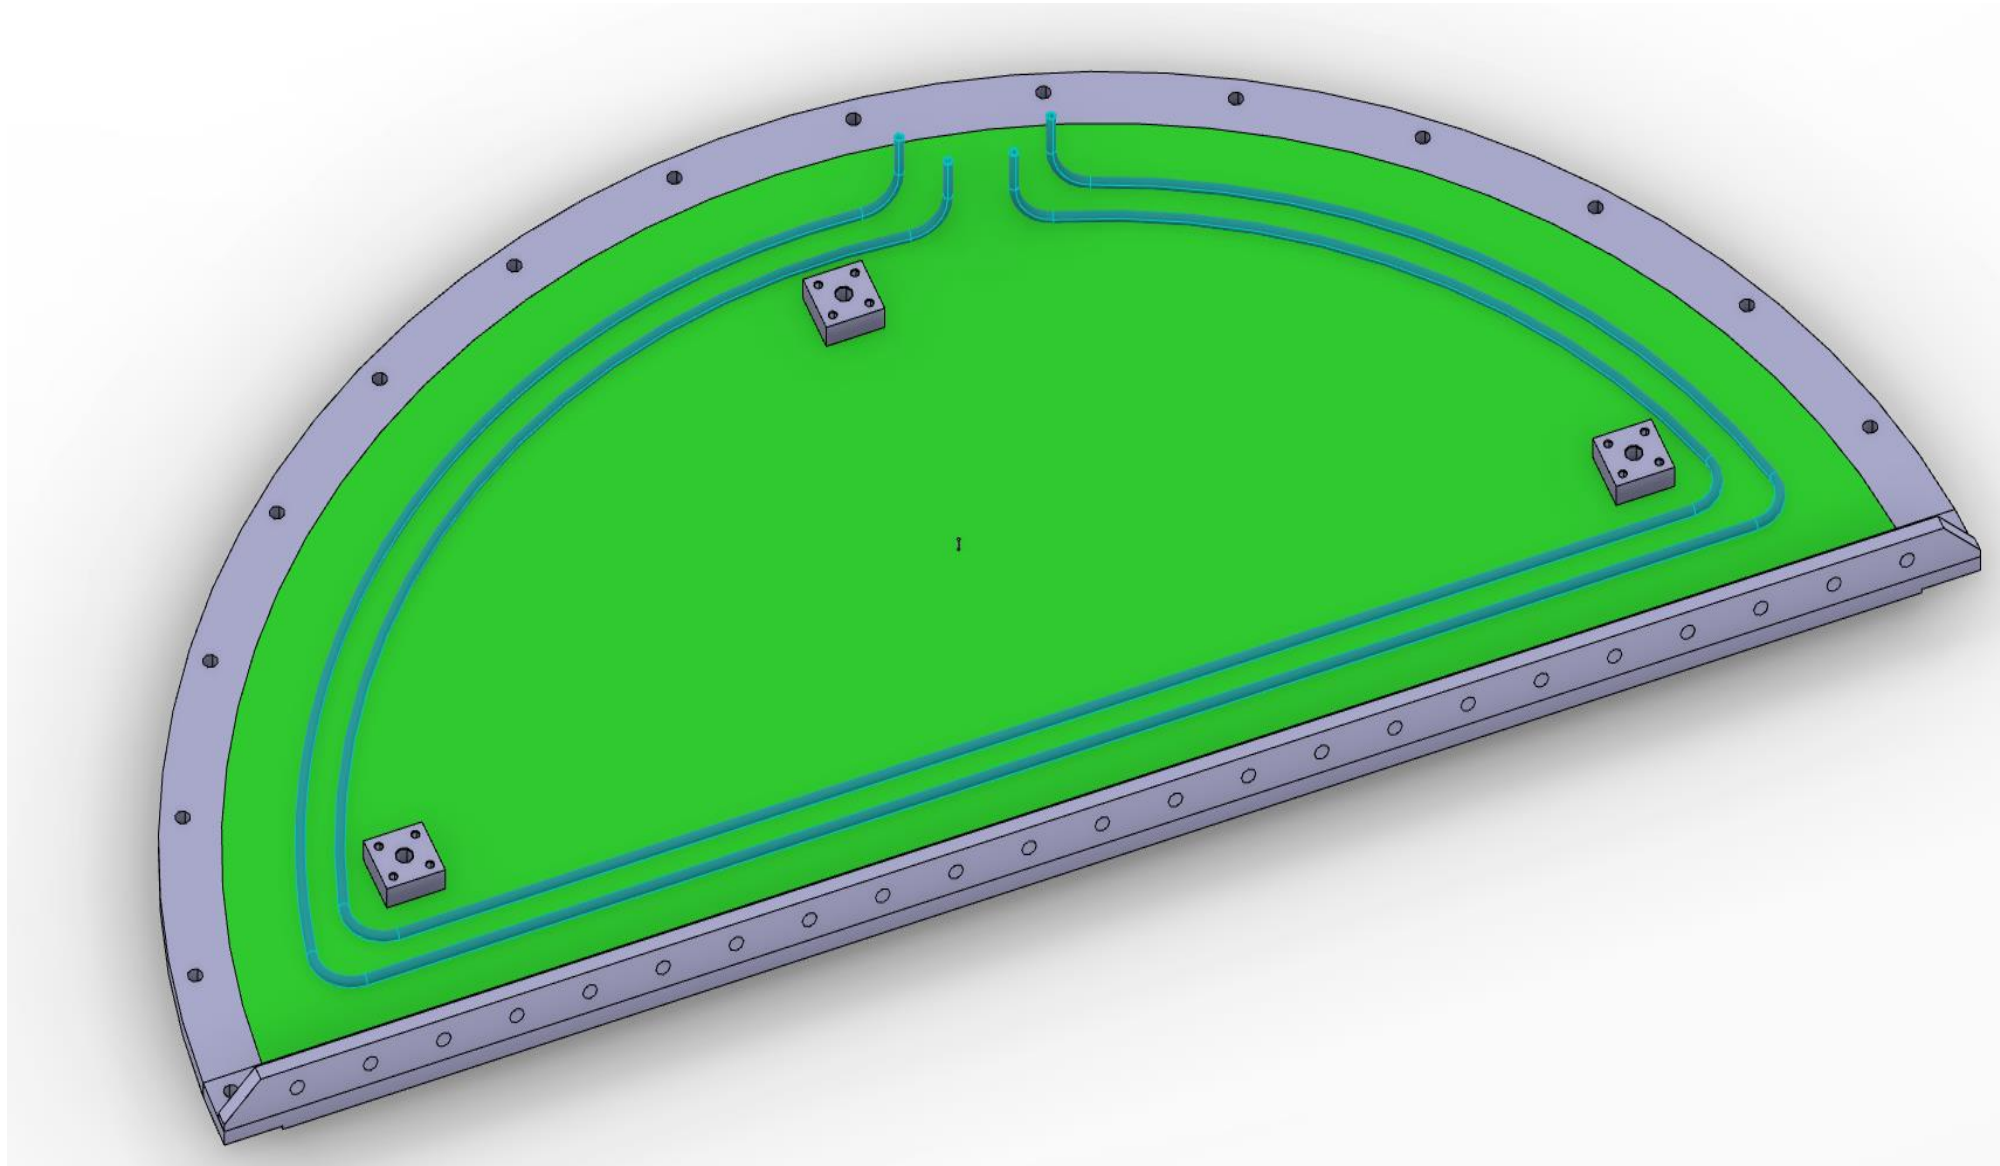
Explode of parts of PF3 Feeder TS Shrouds
